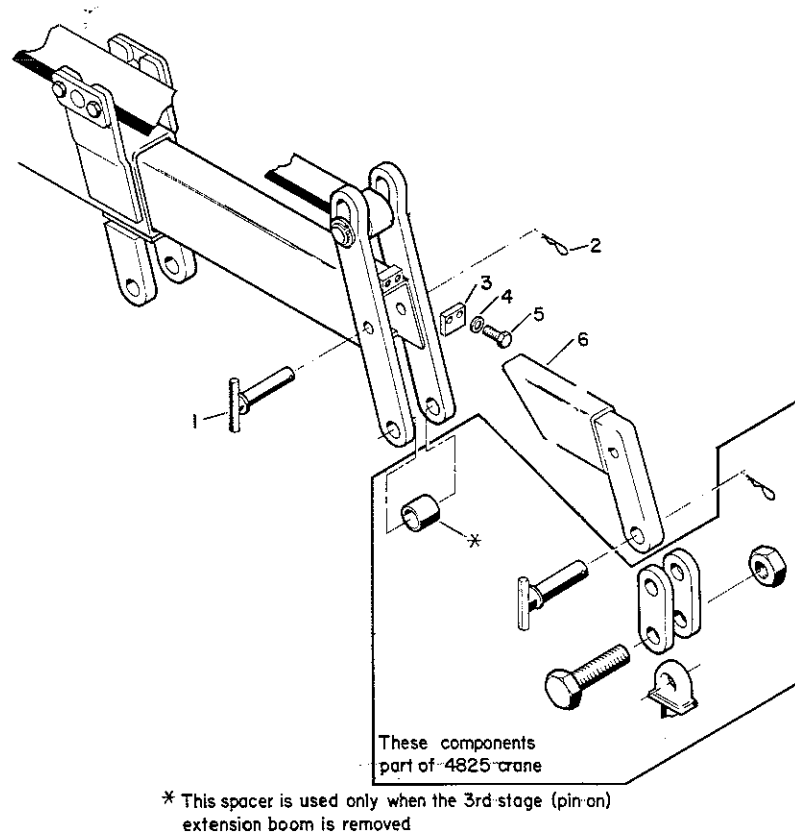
4819 TO 4825 CONVERSION KIT (95705066)
